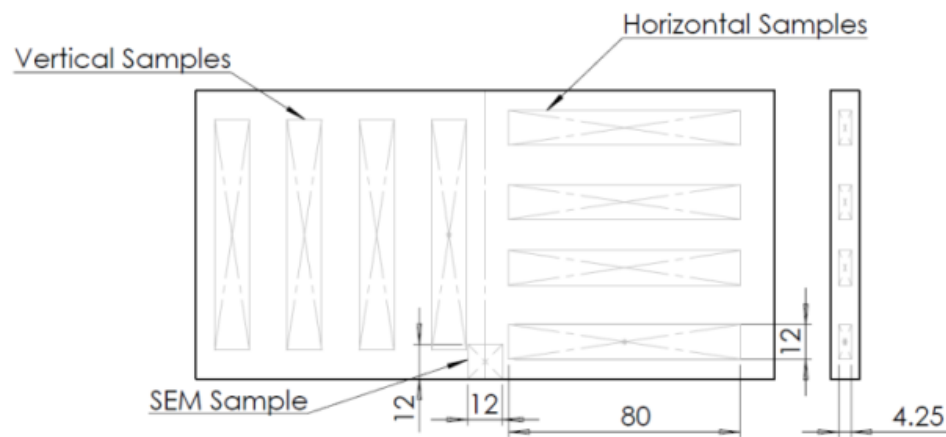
Samples extracted from casting plates (Dimensions in mm)
